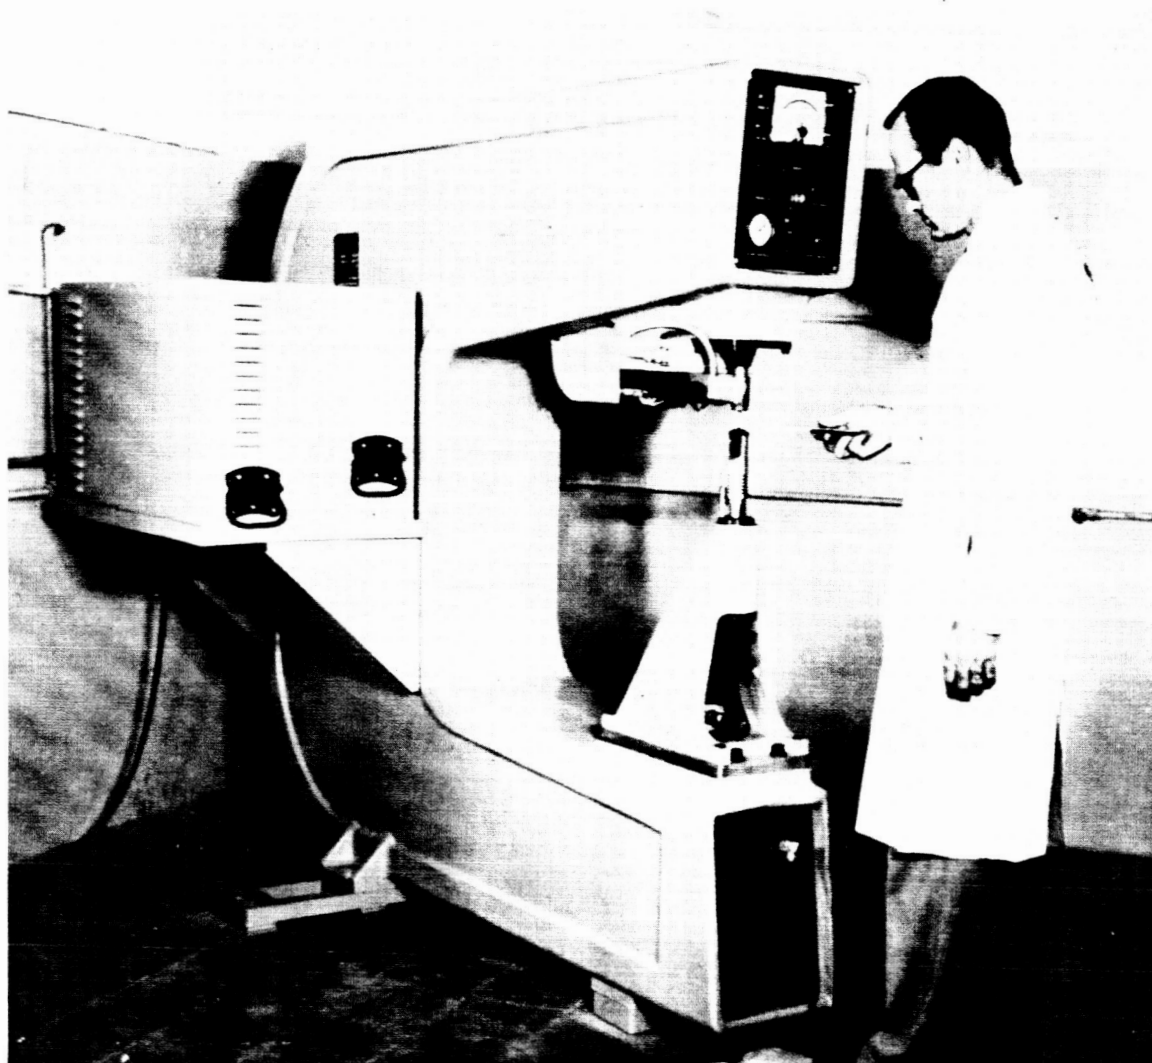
AIRCRAFT TOOLS, INC. , INDUCTION-COIN-DIMPLING MACHINE (REF. 55)
